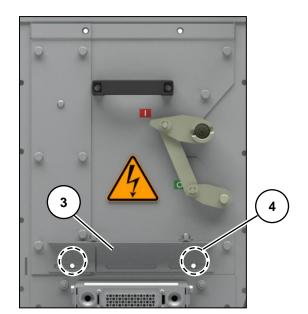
Contactor panels with panel width 435 mm only: 2 bolted joints on the heater support
